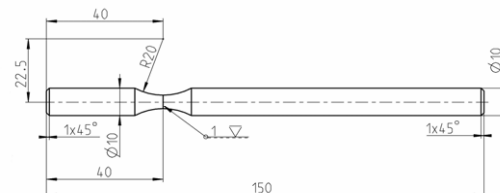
Shape and dimension fatigue test specimen (dimension in mm)
